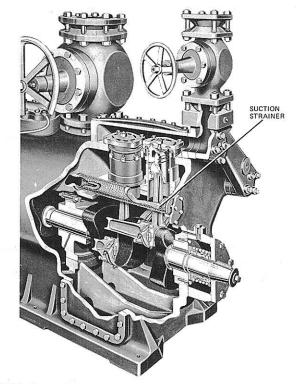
SUCTION STRAINER LOCATION — 12 & 16 CYLINDER COMPRESSOR
